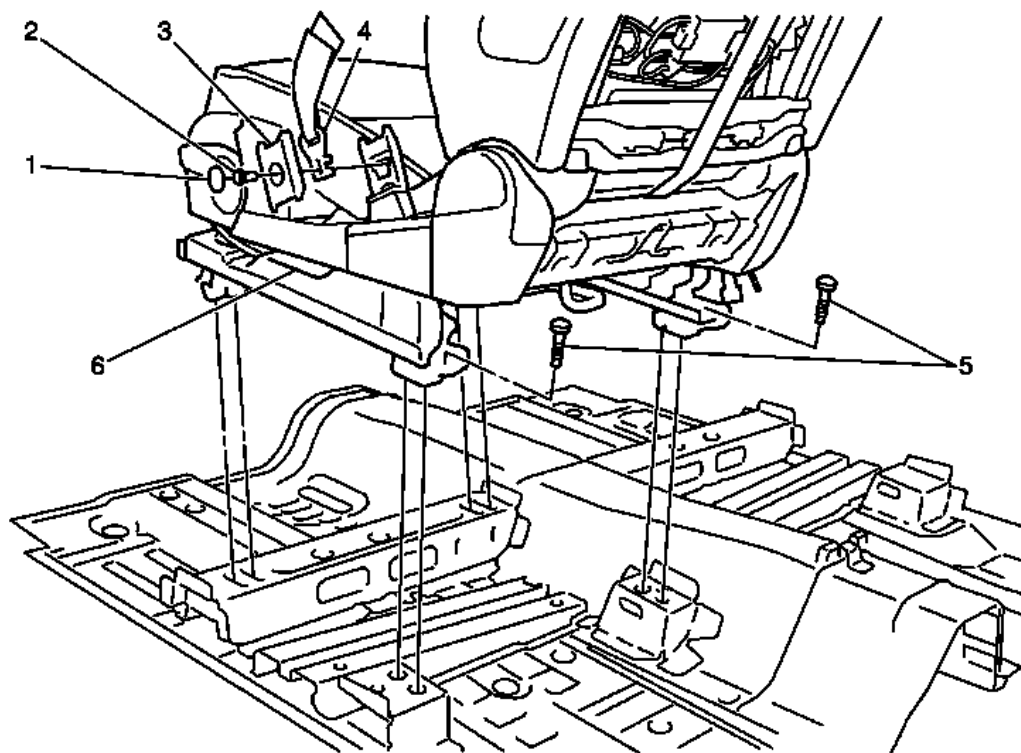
Driver or Passenger Seat (2/4/6-Way Hybrid, 6-Way Hybrid Sport)
